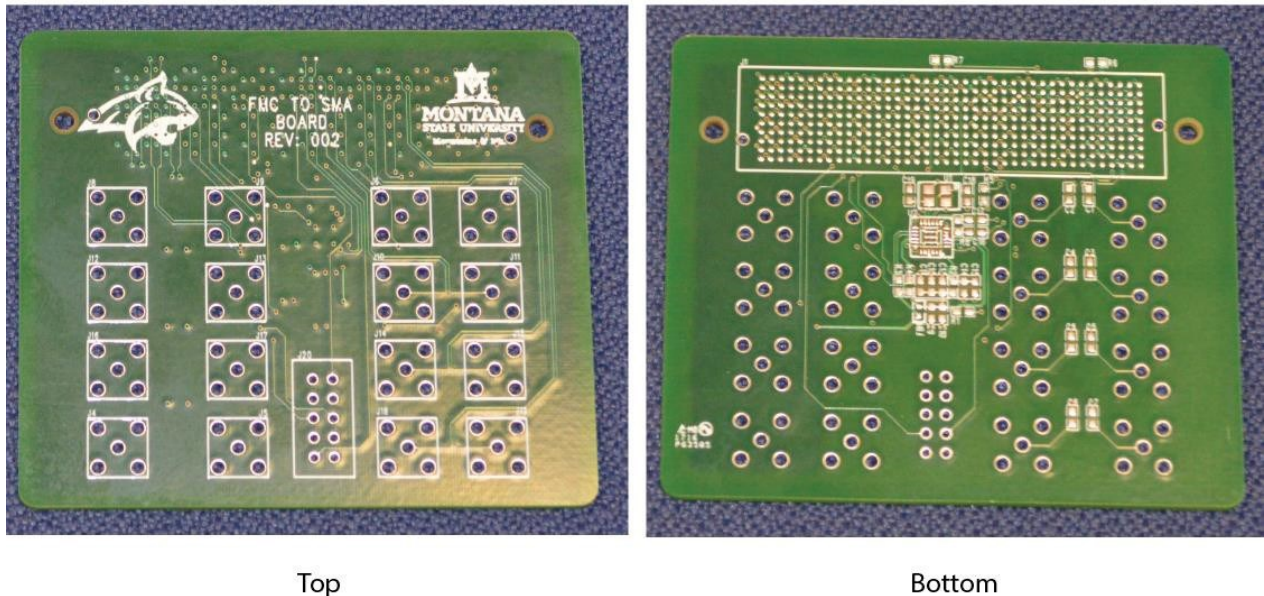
Custom FMC-to-SMA connector printed circuit boards custom designed and produced by students at Montana State University.
